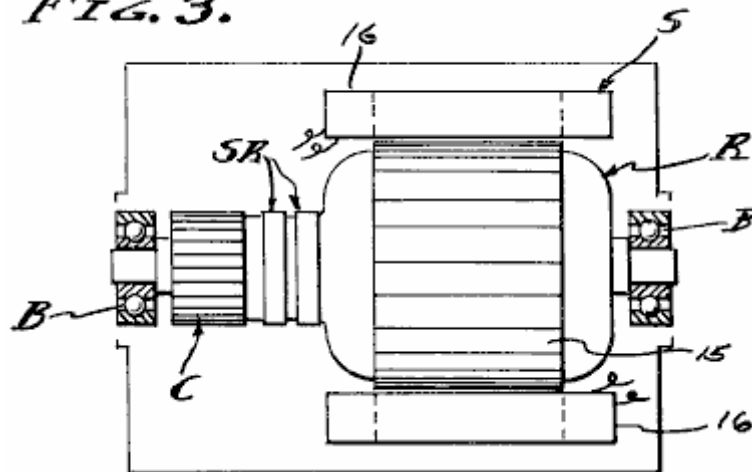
is a longitudinal section through a machine embodying the stator and rotor on bearings with the frame and brushes removed.
